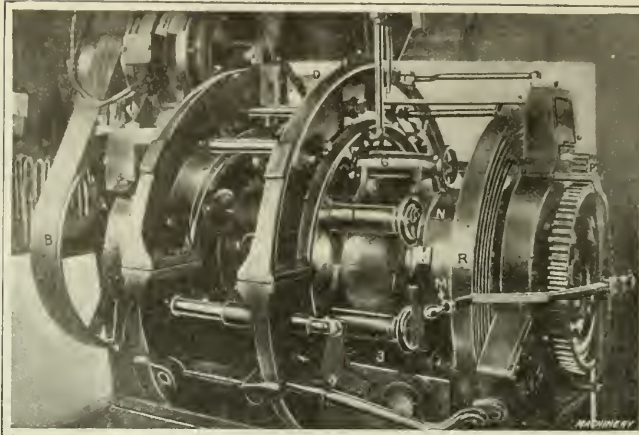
Front View of Semi-automatic Machine for machining Exterior of British 18-pounder High-explosive Shell
